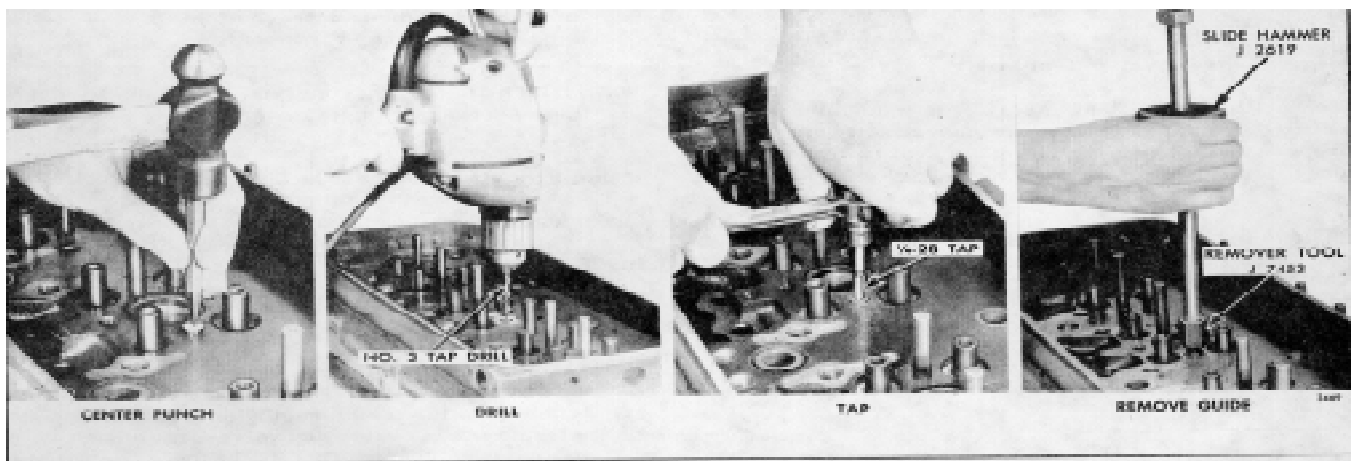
Removing Broken Exhaust Valve Bridge Guide
